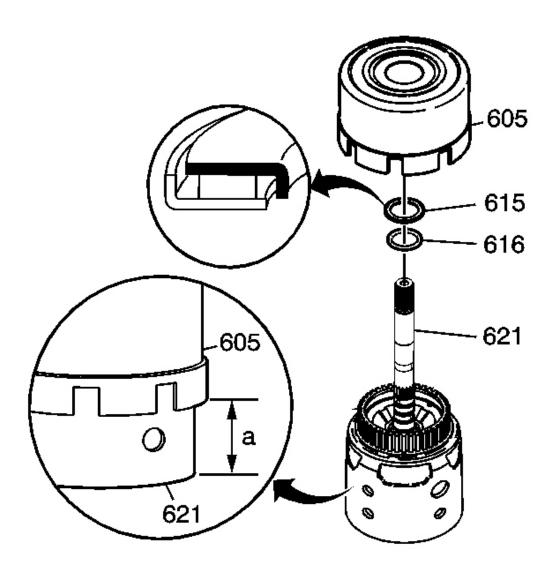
View Of Clutch Housing Components Courtesy of GENERAL MOTORS CORP.
